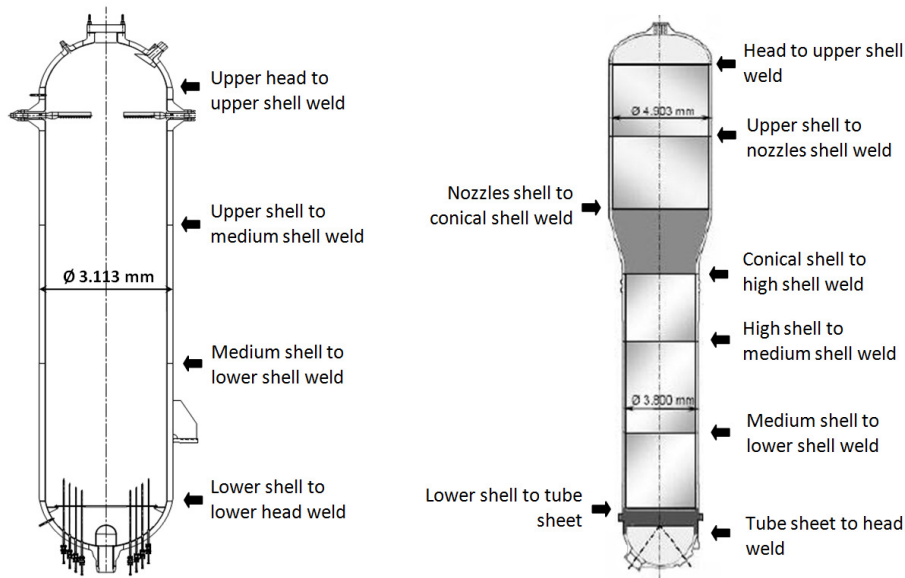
Pressurizer (PZR) and Steam Generator (SG) weld outline
